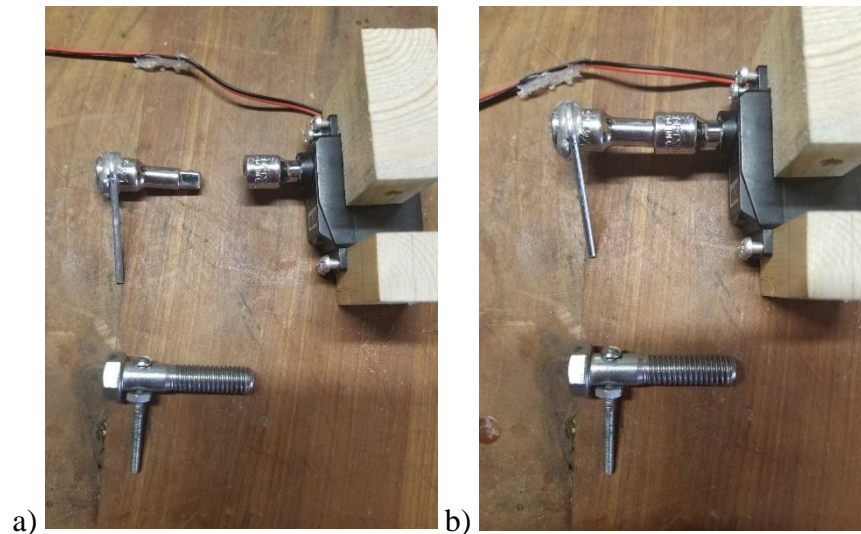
a) The optimized design is shown as the top version of the design. The threaded bolt was the previous design that was unsuccessful. b) The design is shown in its assembled fashion.
